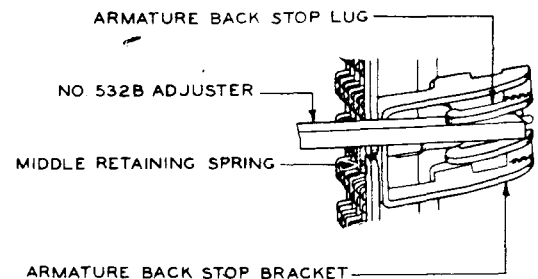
METHOD OF ADJUSTING ARMATURE BACK STOP LUG FOR CLEARANCE
